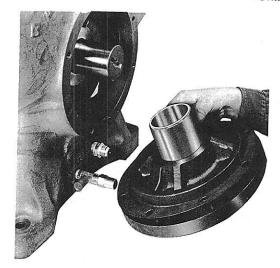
PUMP END BEARING HEAD AND BEARING
